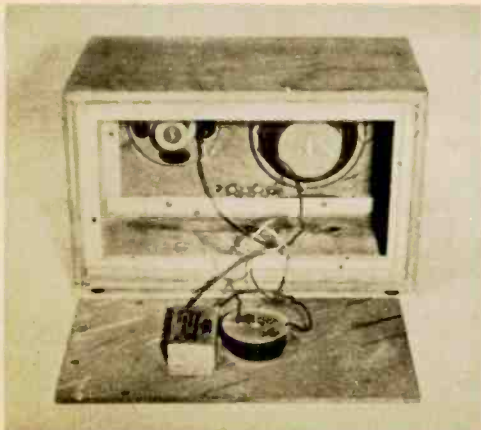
Completed cabinet ready for stuffing with fiberglass blocks. Mount choke with 2 1/2-in.-long machine screw. Cement electrolytics with epoxy.
